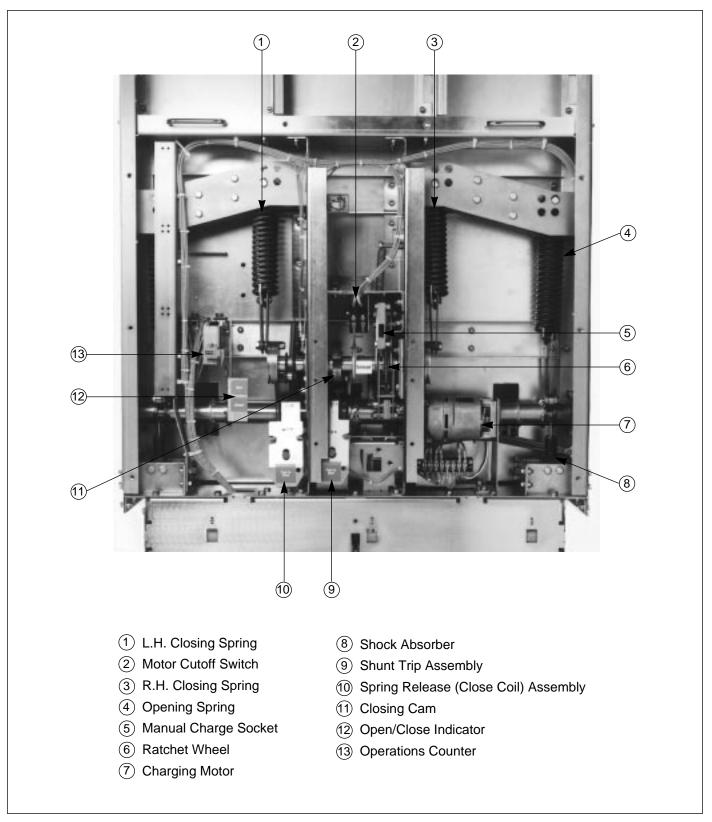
VCP-W 38kV Vacuum Circuit Breaker with Front Cover Removed
